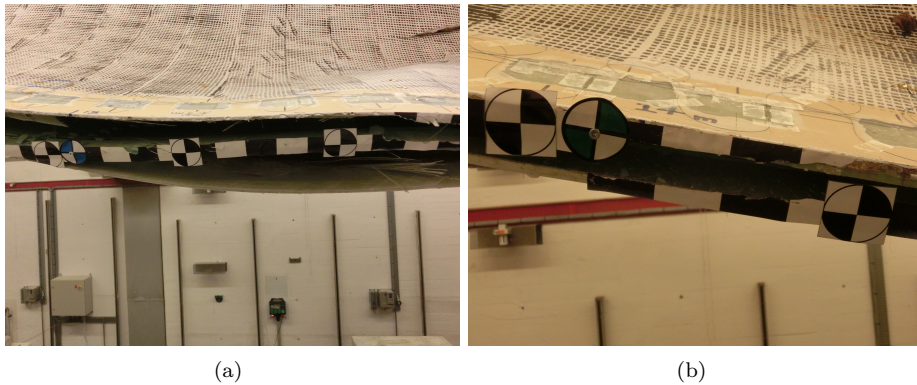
Trailing edge opening after blade failure. (a) Trailing edge separation from the bondline and (b) cracked bondline.
